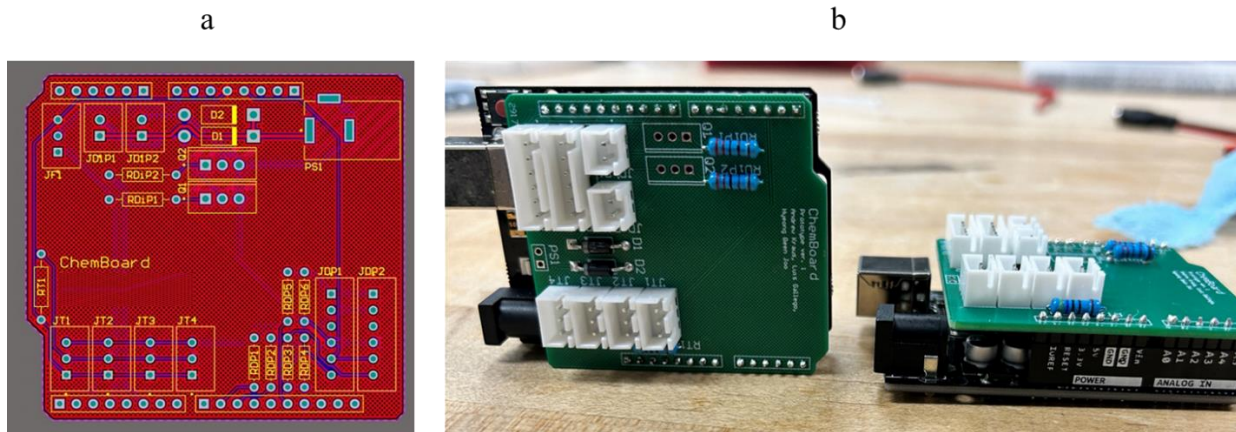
One of the proposed designs for the Printed Circuit Board (PCB) a) Altium schematics of the PCB prior to printing, b) actual pictures of the PCB-microprocessor assembly. Designs shown in this picture correspond to one of the multiple versions of the current work-in-progress.
